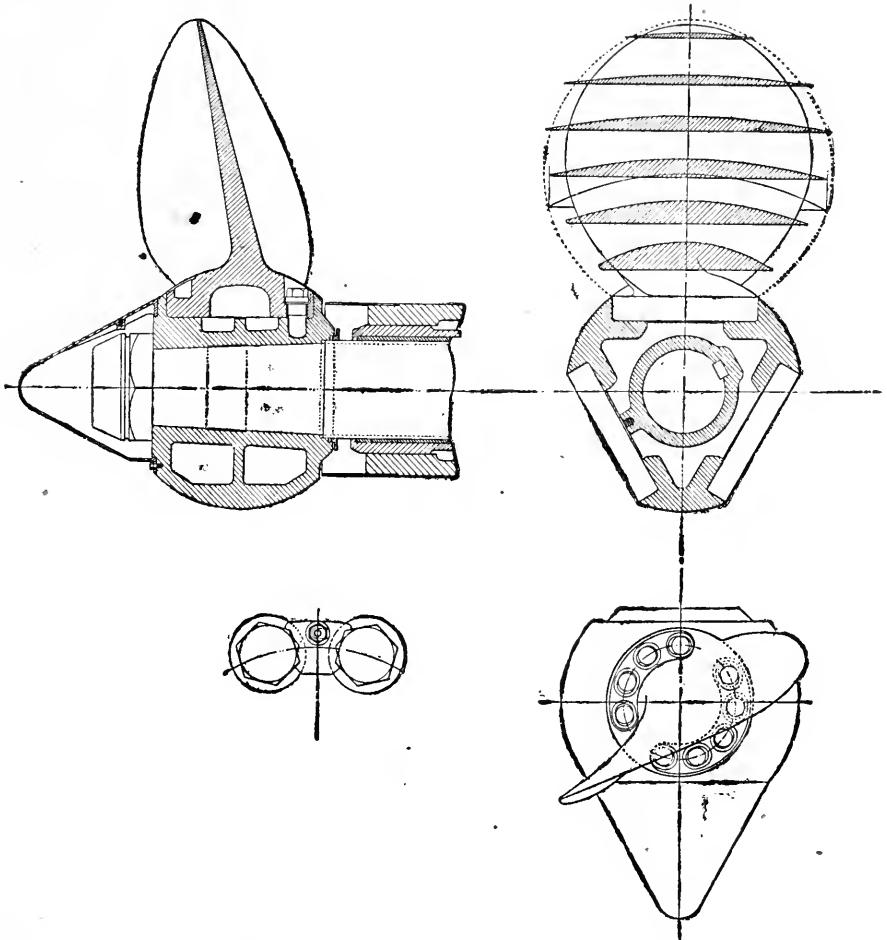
Modern Fast-running Bronze Screw for Cruiser.
